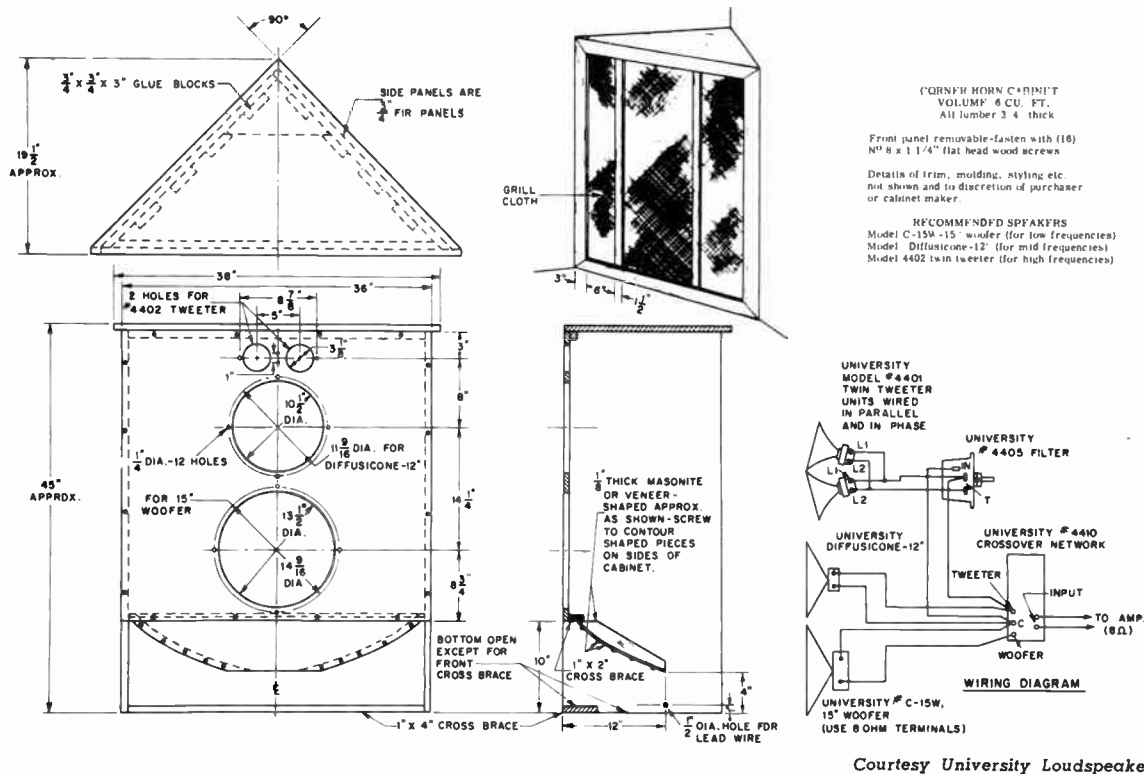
Construction Details of Enclosure for the Weiler Progressive Loudspeaker System
